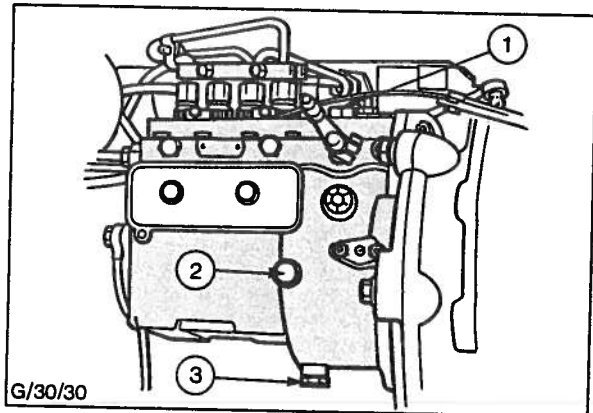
Injection Pump Oil Plugs (Class 'A' and Combine Harvester Governing Only)
